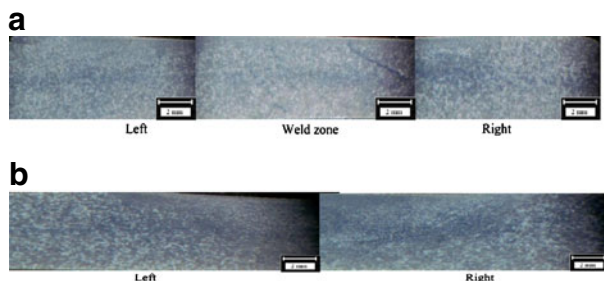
Macrostructure of FSW blanks made of AA 5xxx using different shoulder diameters at constant tool rotation speed
